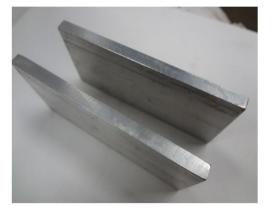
Welding sides of Al 6351 alloy plates
